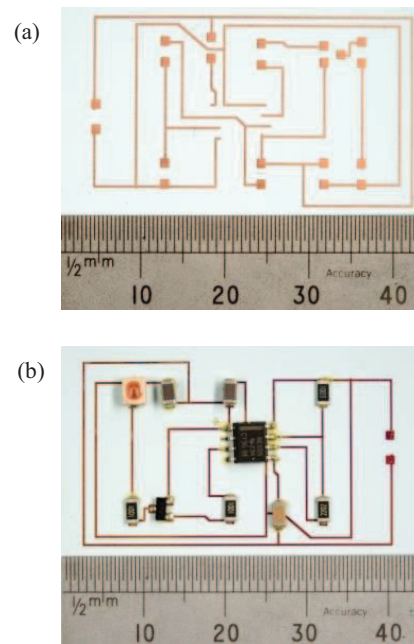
(a) Deposited copper on circuit pattern (b) Complete circuit after component assembly
